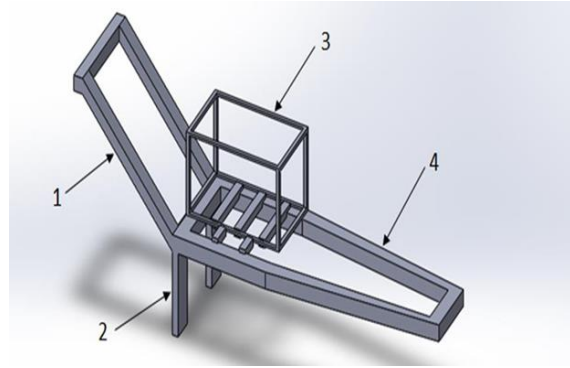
Computer aided design of the frame of the sprinkler machine
